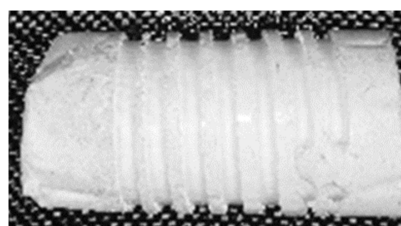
Silicone rubber mold by medium pressurizing cone cylinder.
